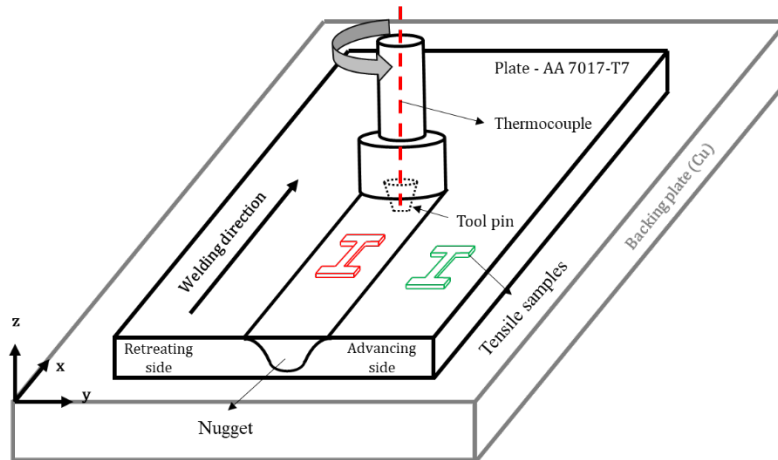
Schematic of FSW with a thermocouple inserted in the tool and locations marked for mini tensile samples.
